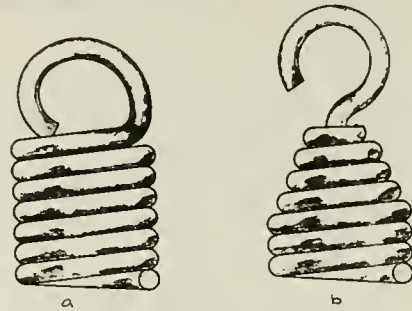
(a) TYPE OF SPRINGS FIRST USED. (b) IMPROVED TYPE.
